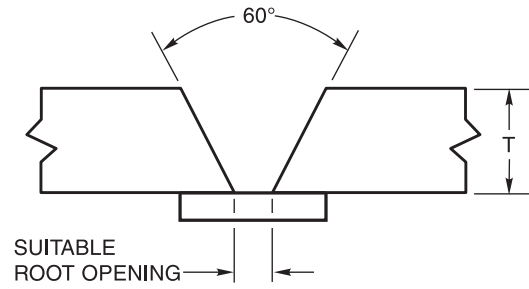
B—Pipe Test Butt Joint with Backing—Welder Qualification
